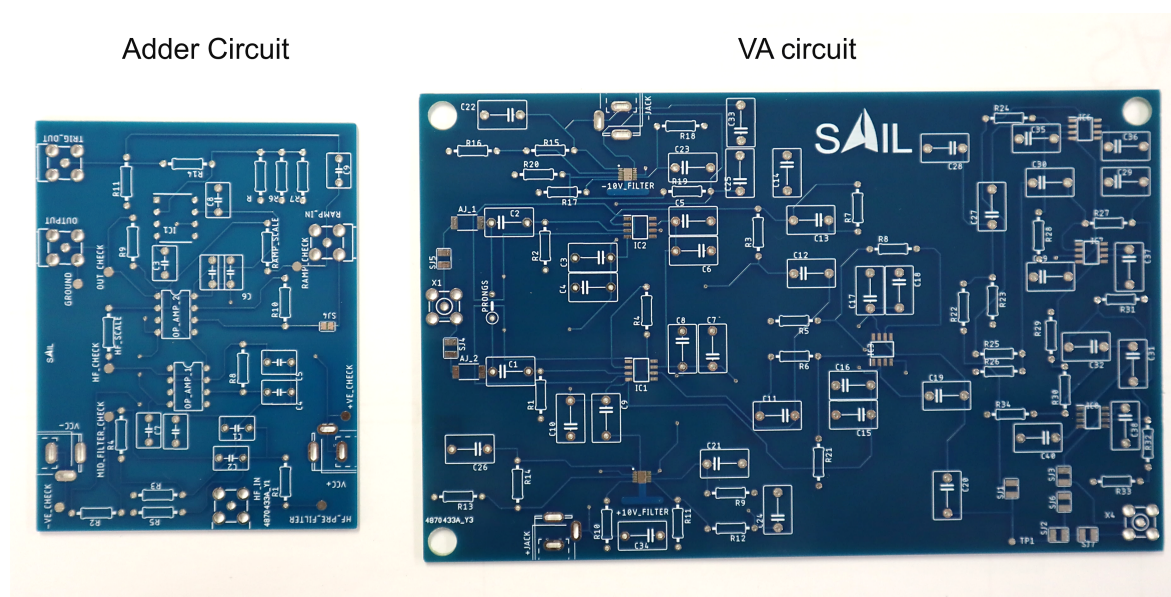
Picture of the printed PCBs prior to any part placements.
